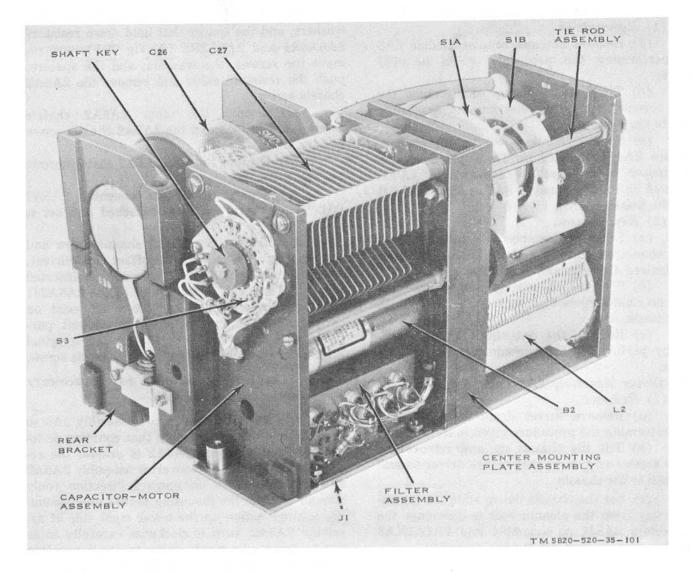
Antenna coupler assembly 2A3, parts location, rear oblique view.
